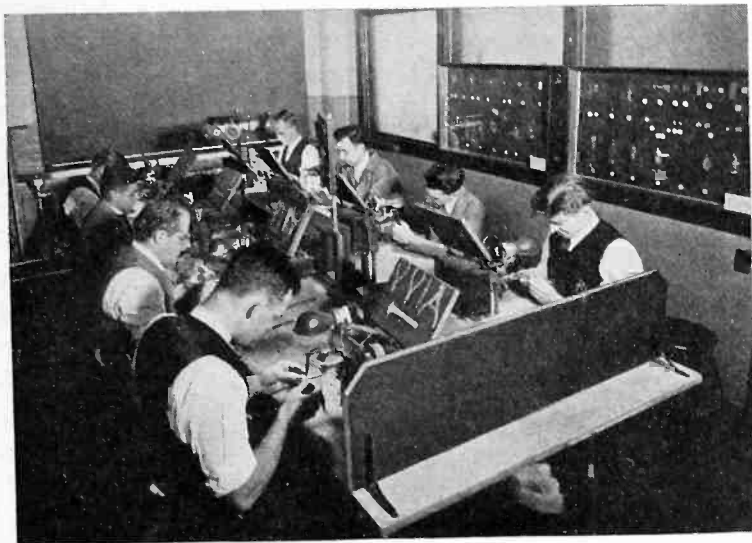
Students assembling vacuum tubes of their own design. Eight spot welders and a supply of standard tube parts are available for this work
